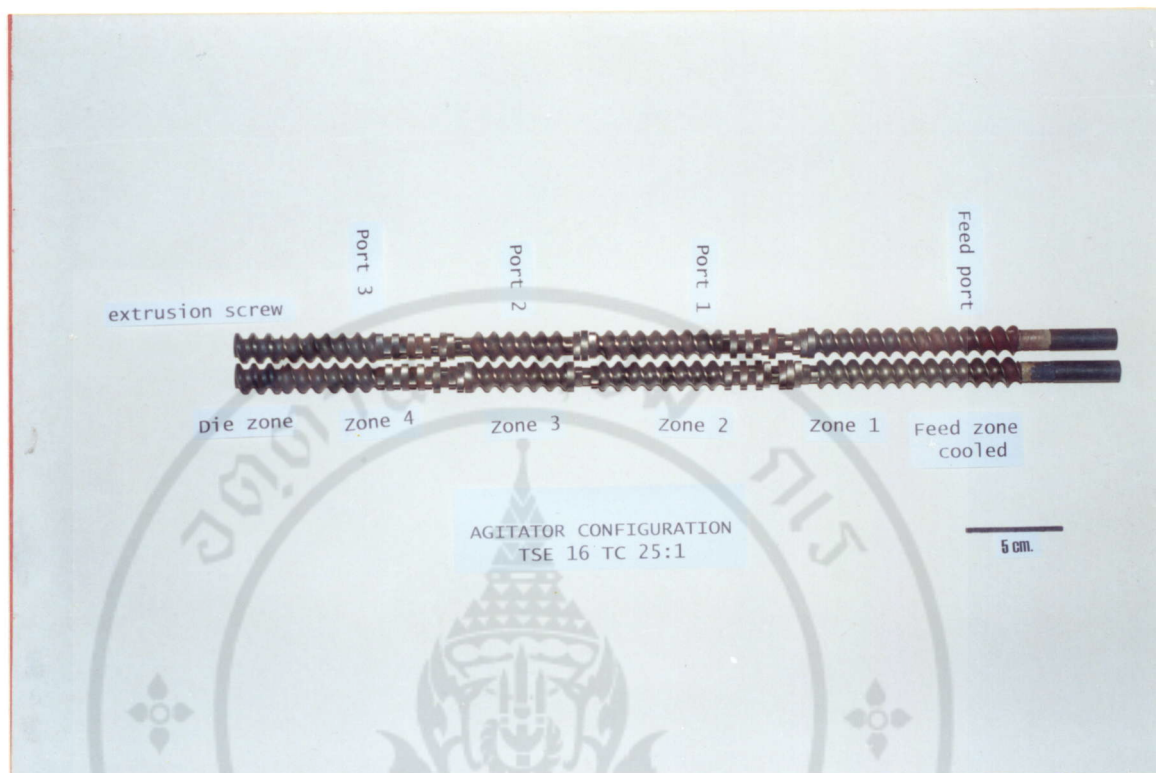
The agitator extruder screw configuration C installed in twin screw extruder (TSE 16 TC 25:1)
